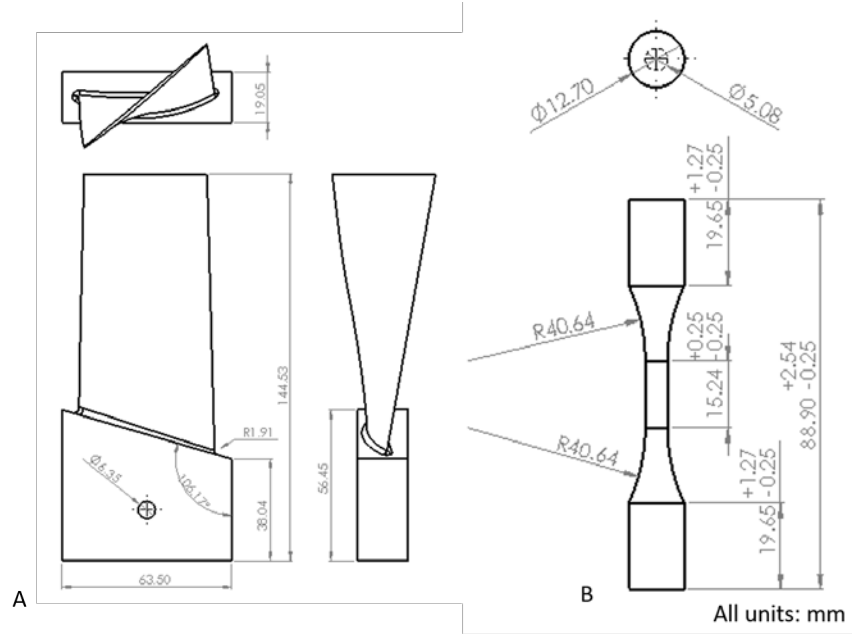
A) Dimensions for the turbine blades. B) Dimensions for the fatigue bars [12]
